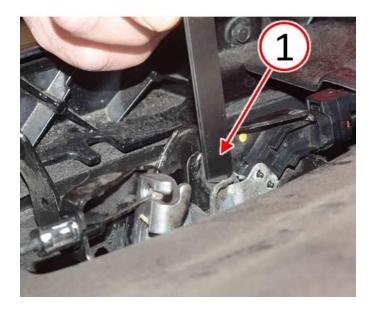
Measure Hood Latch Ratchet to Latch Cover Plate Clearance
